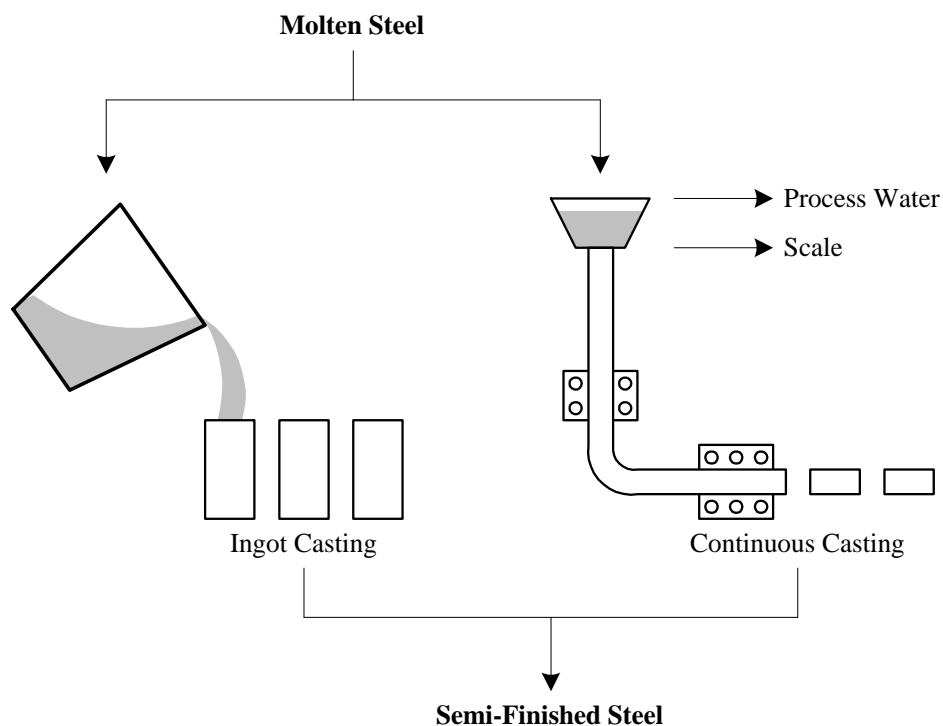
Steel Casting Processes: Ingot Casting and Continuous Casting
